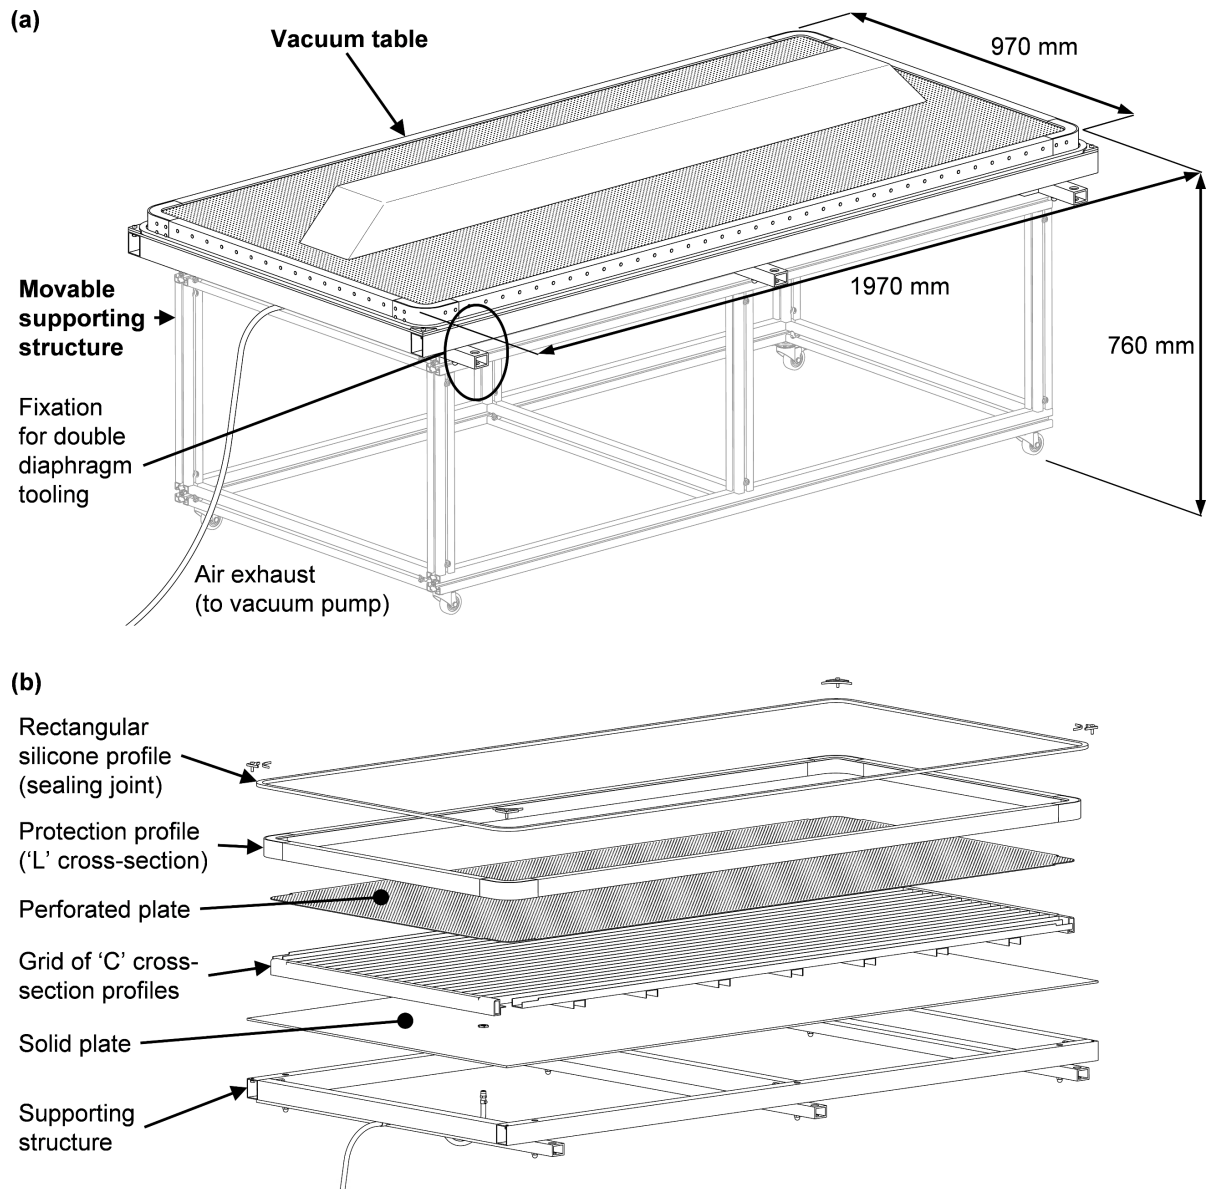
Vacuum table design: (a) vacuum table and supporting structure , (b) exploded view of vacuum table.
